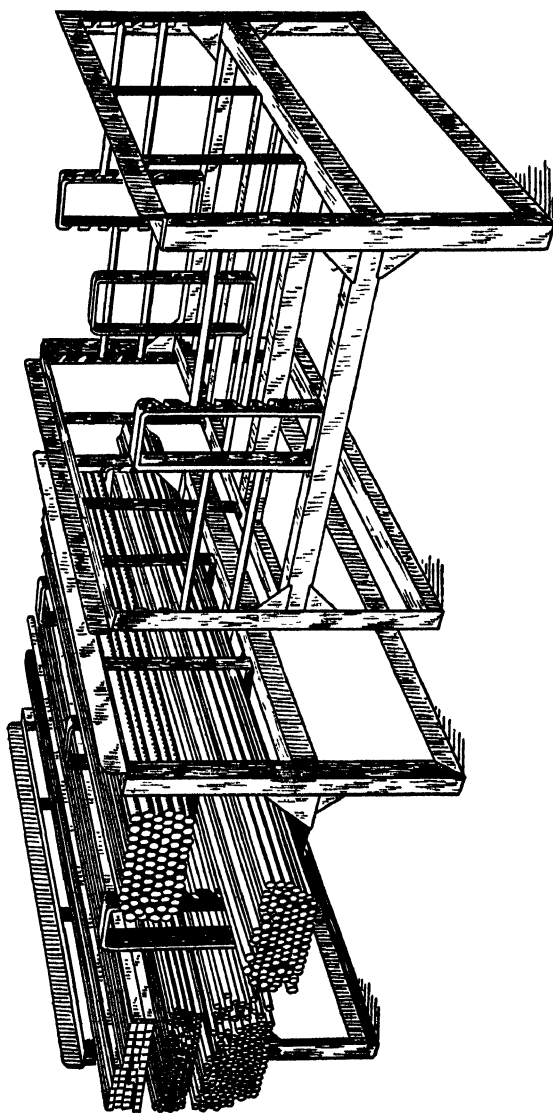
Racks for Short Bar Stock Designed for Stacking and Handling by Fork or Lift Trucks
